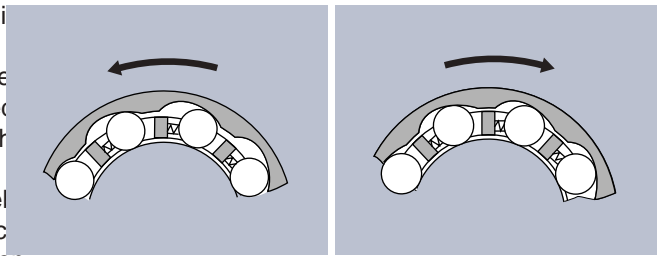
One-way clutch in engagement Fig. 2 One-way clutch in idling
